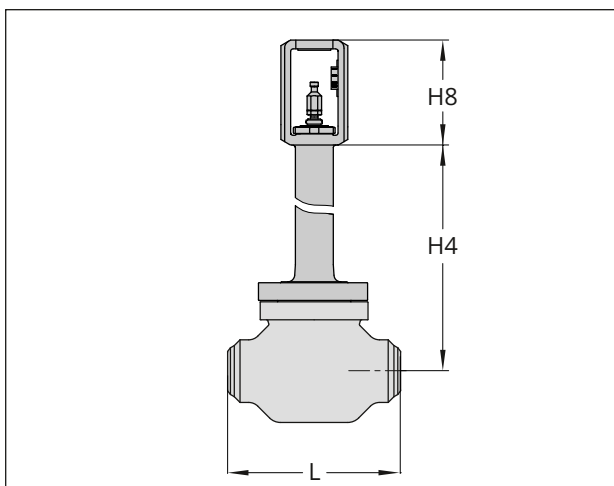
Type 3251/3251-AM with bellows seal or insulating section
